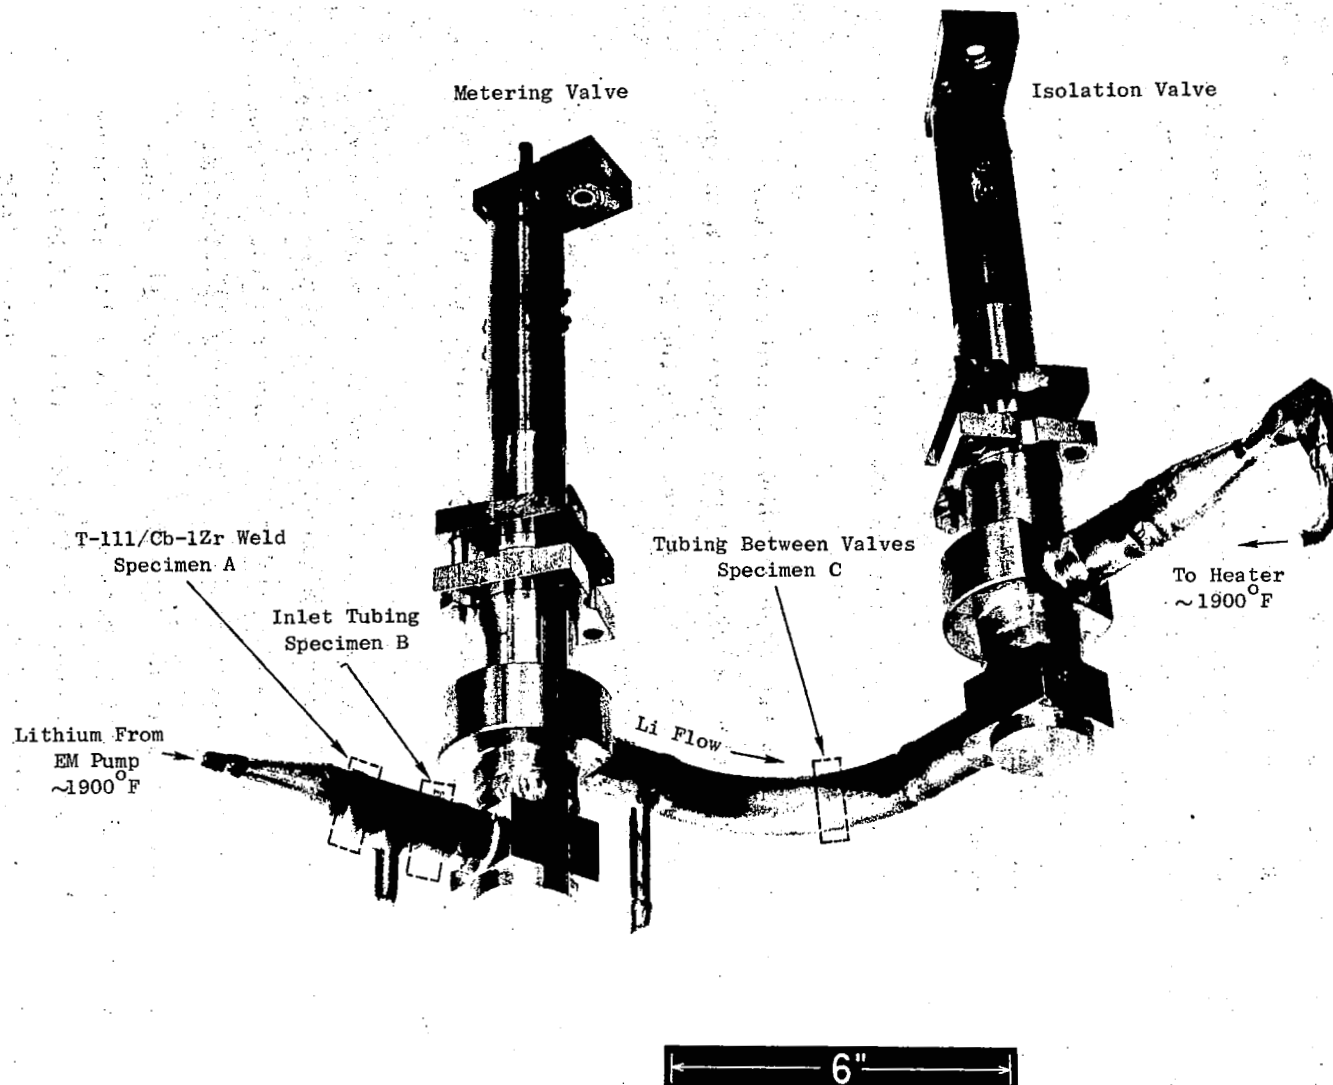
Metering and Isolation Valve Assembly As-Removed from the Loop Upon Completion of 5000 Hours of Testing Showing Location of Specimens Removed for Bend Testing. (Orig. P69-7-42C)
